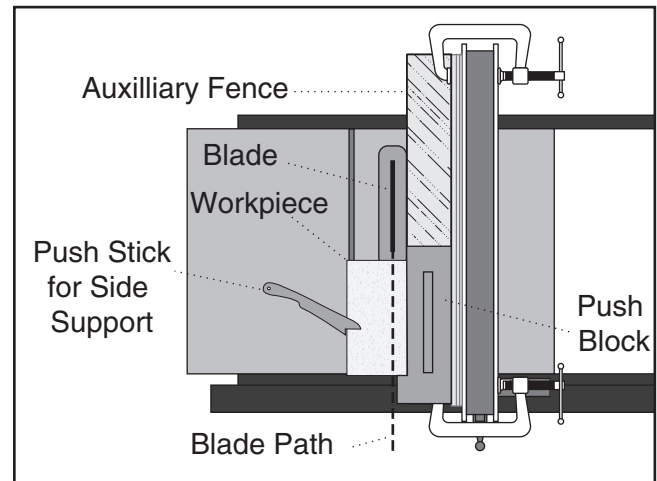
Adjusting ripping distance between blade and auxiliary fence.
